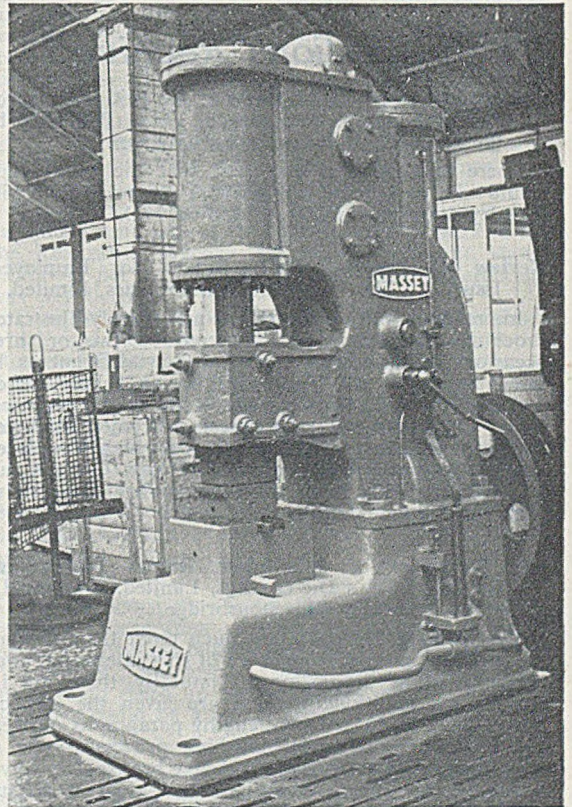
Forging Hammer on Test; for this the Base-plate and Anvil were cast in One Piece (see Fig. 28).
